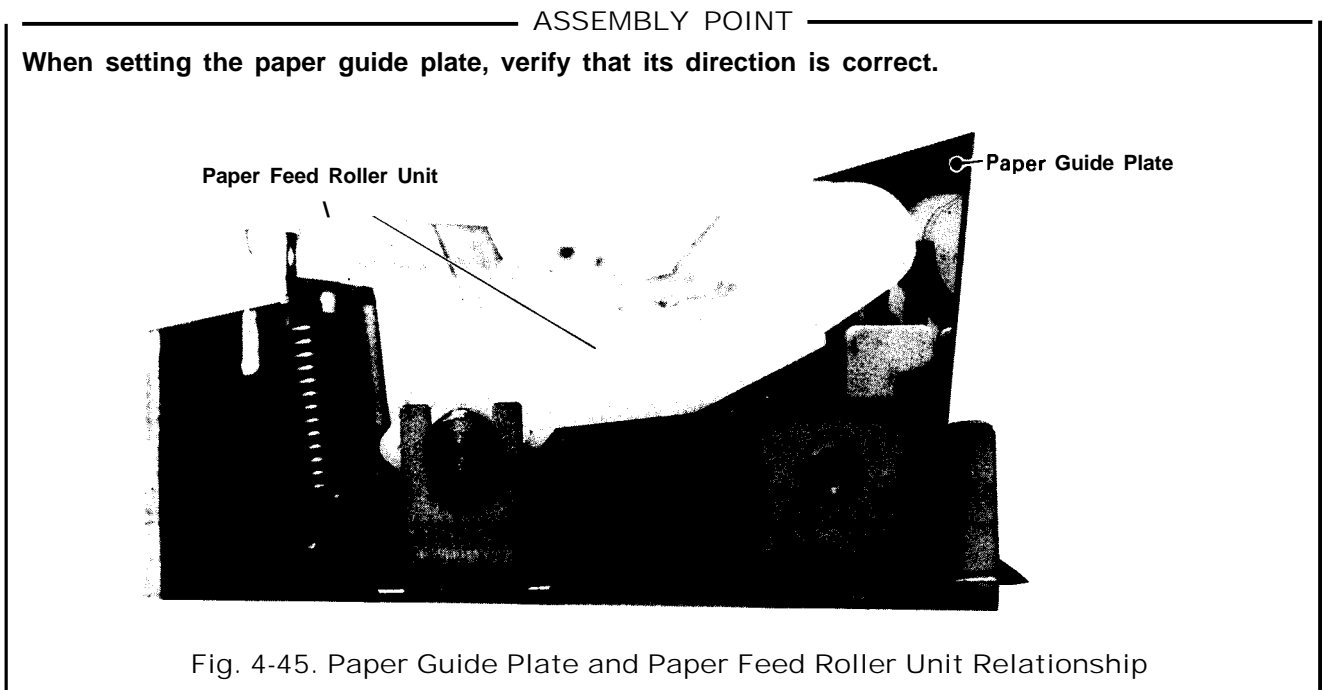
Paper Guide Plate and Paper Feed Roller Unit Relationship
